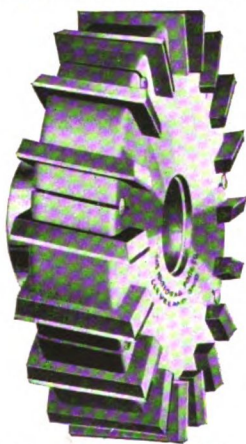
Inserted Tooth Face Milling Cutter—Taper Hole
